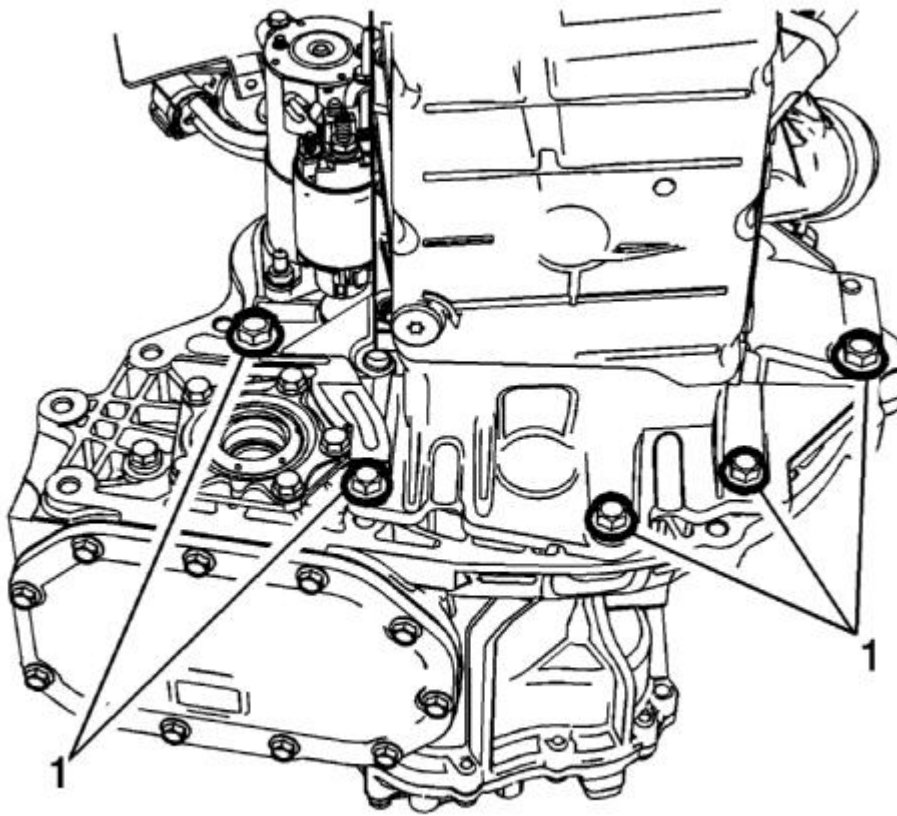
Lower Oil Pan To Transmission Lower Bolts
